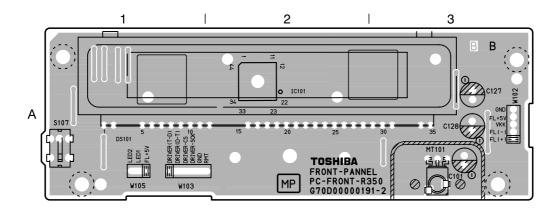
EU03A Front (R) PC Broad (Top side)
